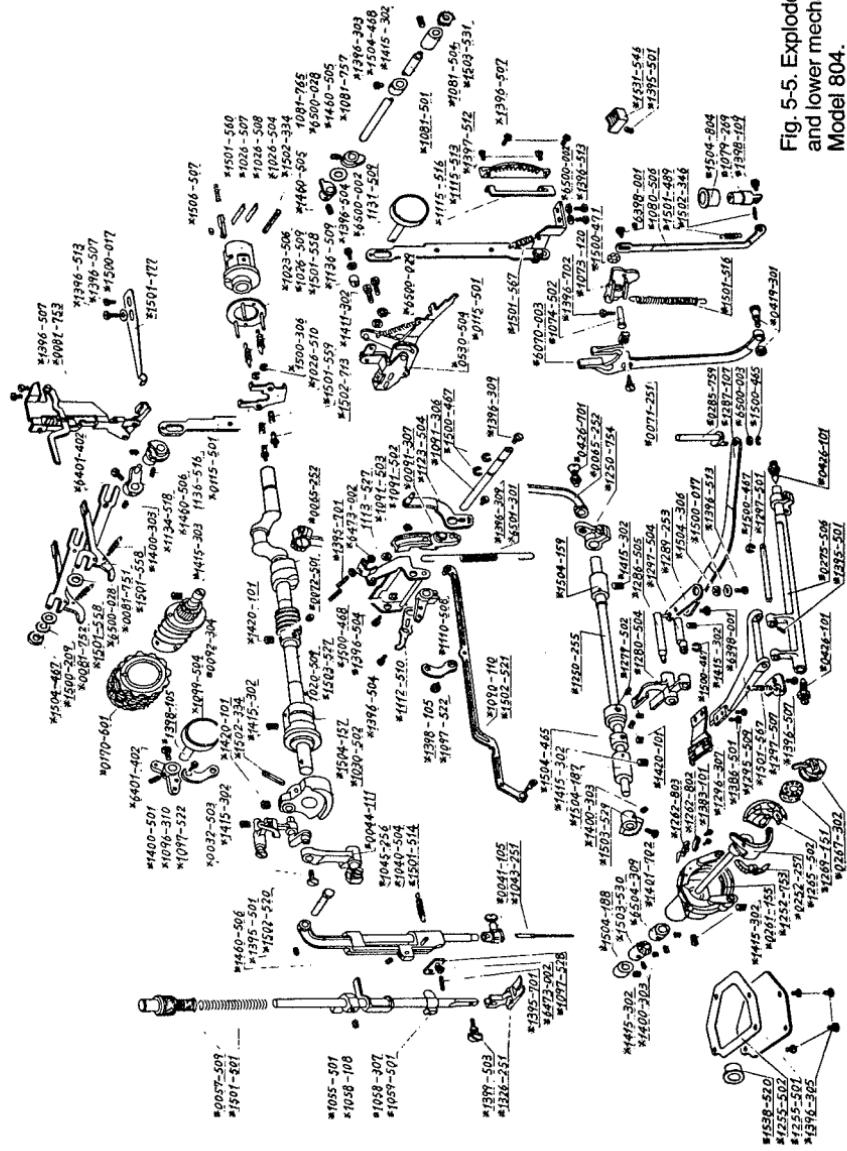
Exploded view of the upper and lower mechanisms of the White Model 804.
